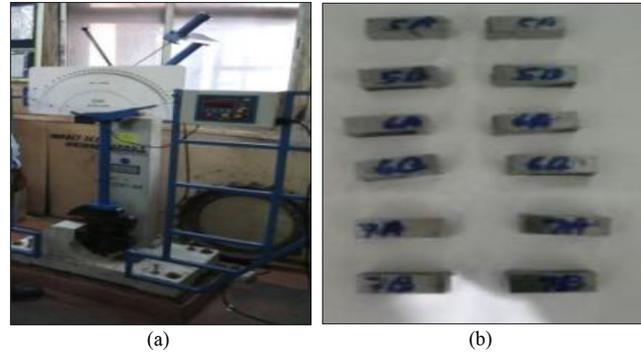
(a) Impact test setup used, and (b) Samples after breaking.
